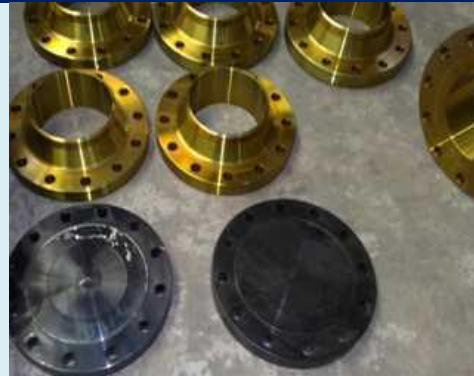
Materials used such as 300 Lbs Weld Neck and Blind Flanges
